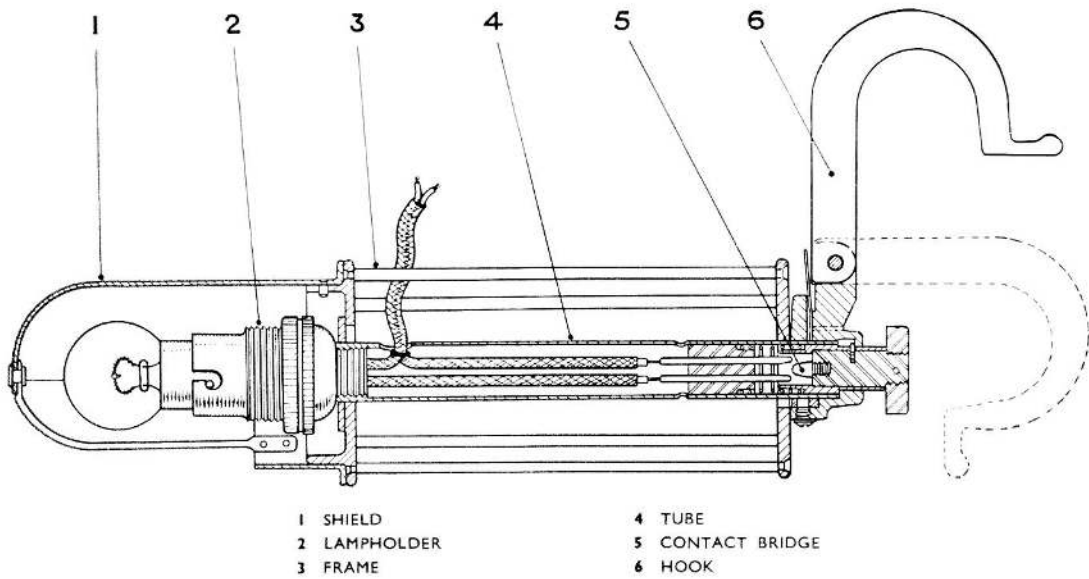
Sectional view, inspection lamp, Mk. 2
